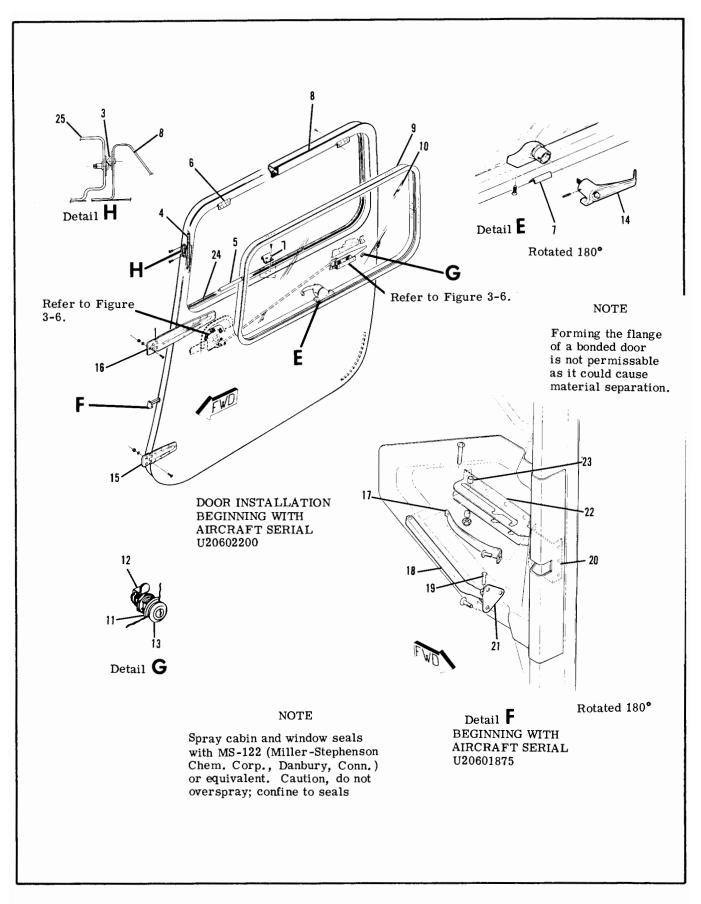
Cabin Door Installation (Sheet 2 of 2)
